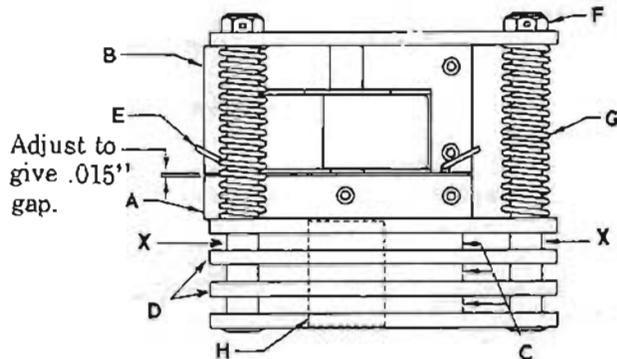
DISC BRAKE ADJUSTMENT
